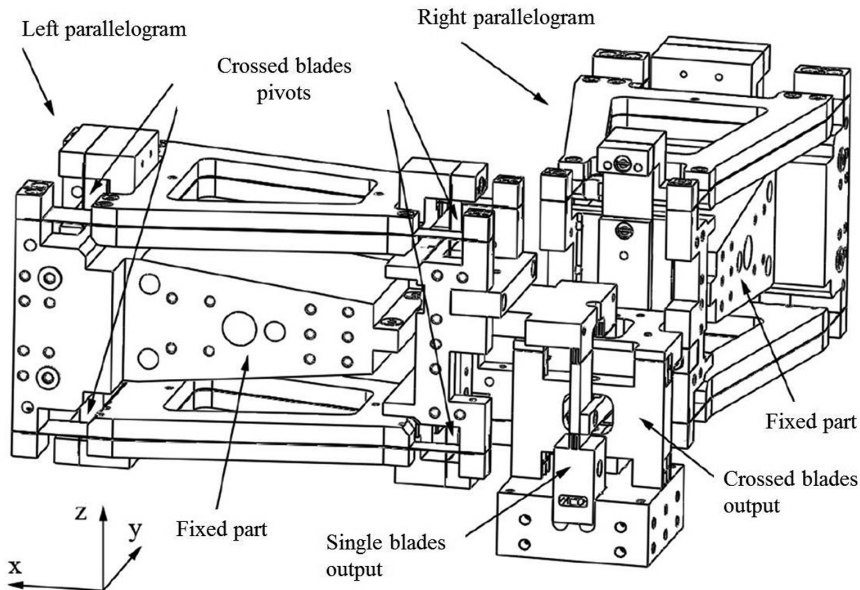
CAD view of the Sarrus prototype. The overall dimensions are 290 mm × 290 mm × 150 mm. Two parallelograms are linked to the output parts, one with cross leaf springs, one with single leaf springs.
